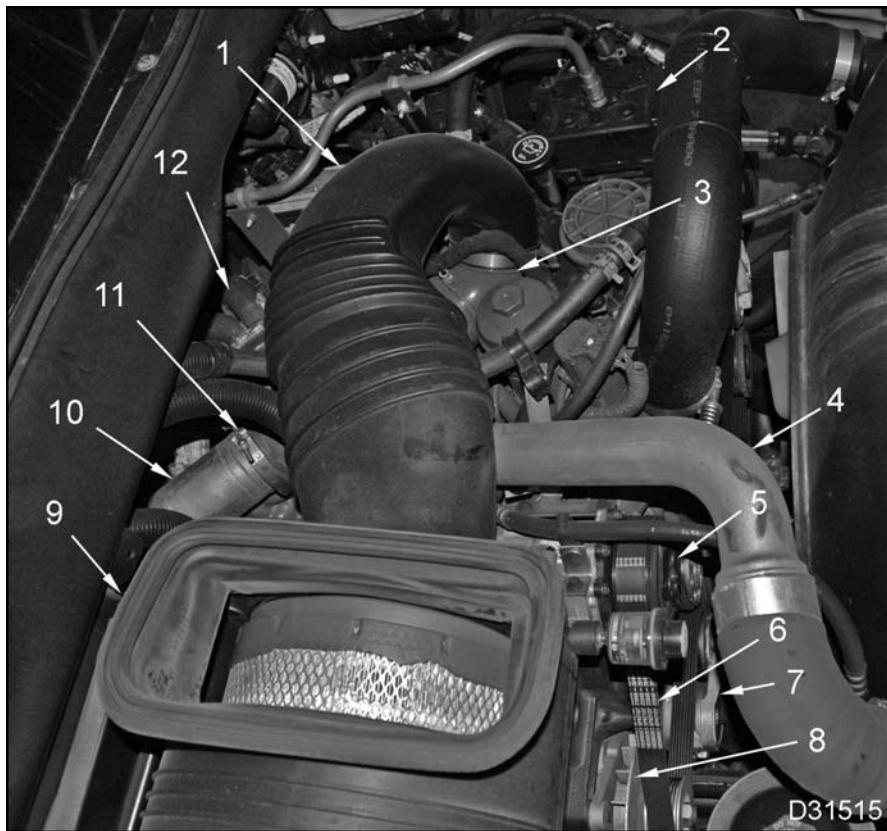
Parts for removal (Engine In-chassis – 4100 truck)
